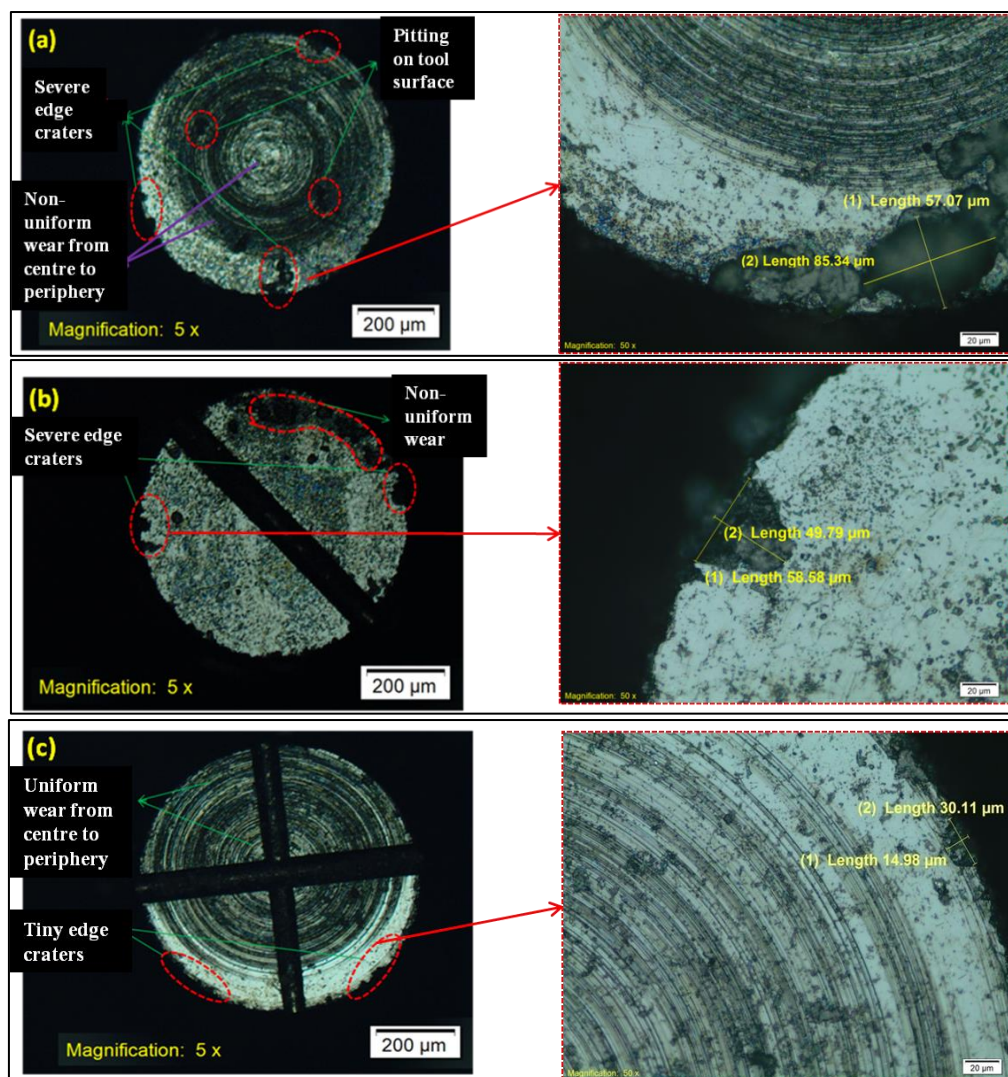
Worn out end faces of tool types (a) NG, (b) 1G, (c) 2G
